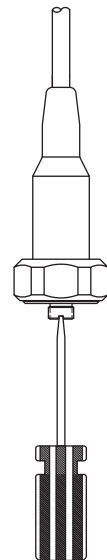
Mounting hole is prepared into machine surface to accept sensor's mounting stud. Sensor integral cable is threaded through the floating hex nut.
